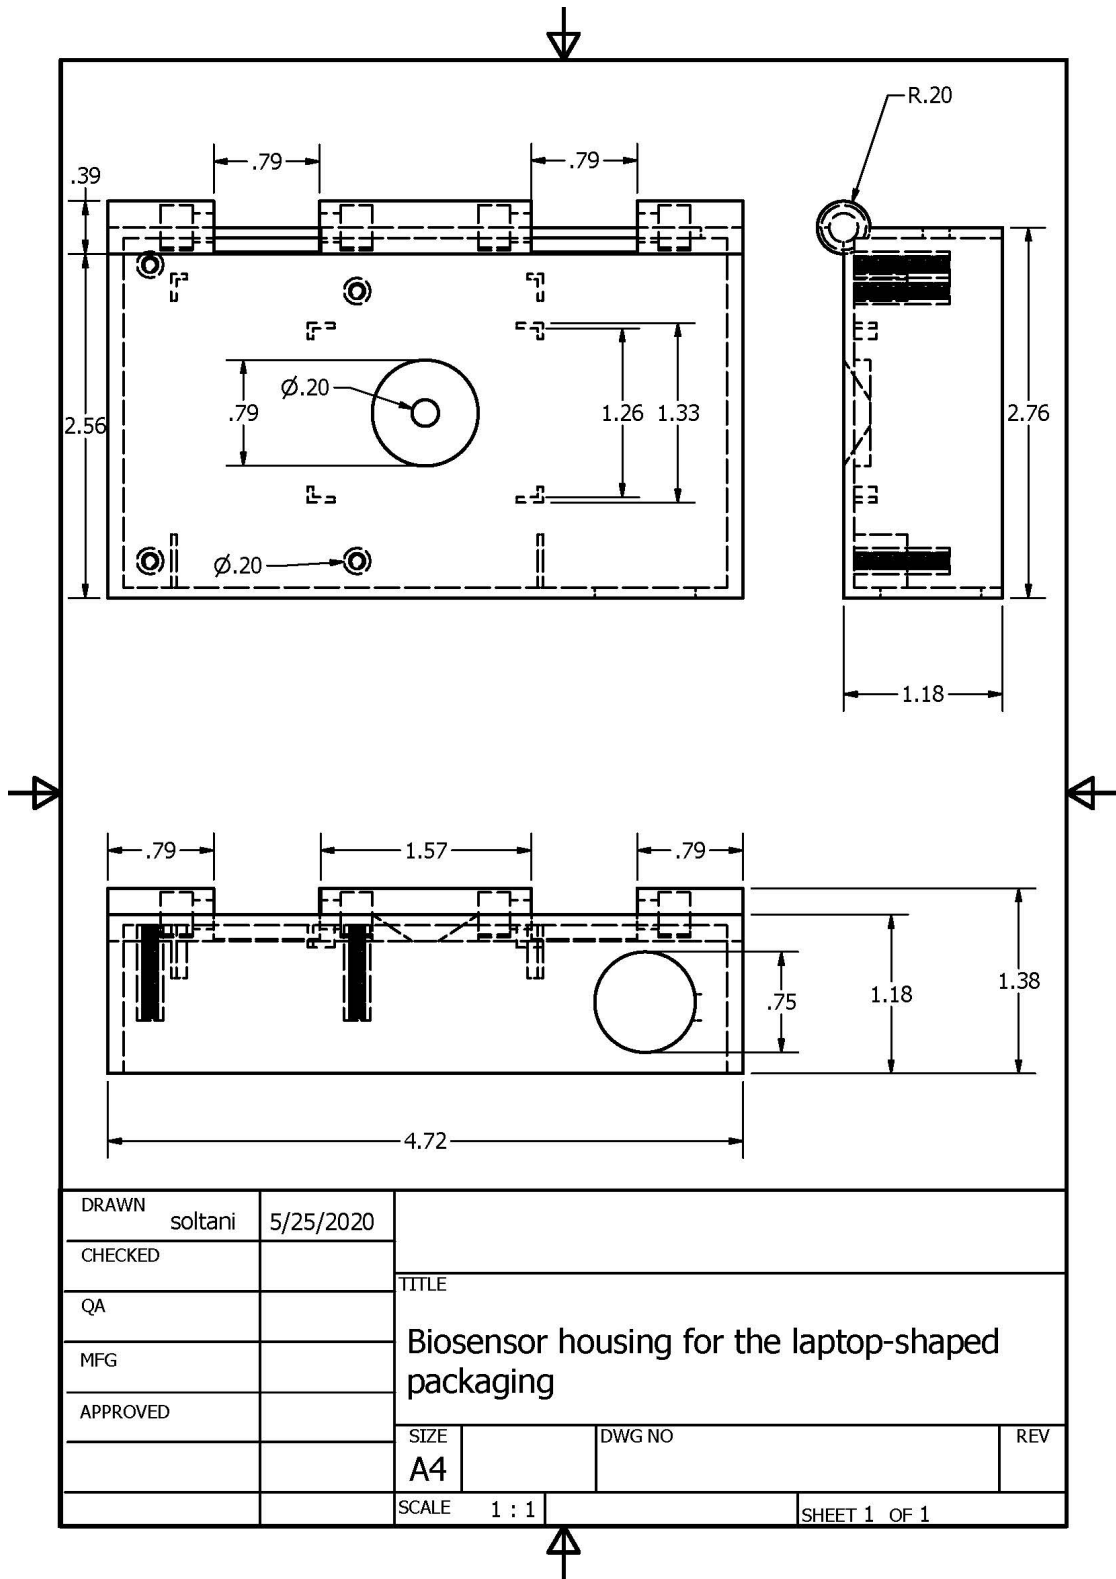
Technical drawing for the biosensor housing, illustrated in Fig. 3.10.
